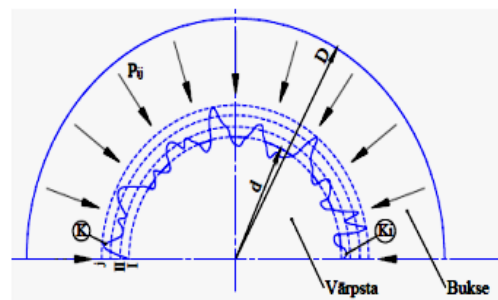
Contact schema of rough (spindle) and even (bush) surfaces of cylindrical surfaces:
